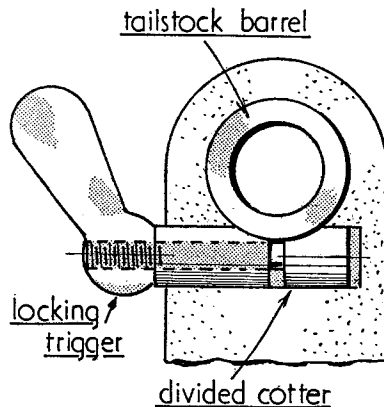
Method of locking the Myford M.L.7 tailstock barrel
